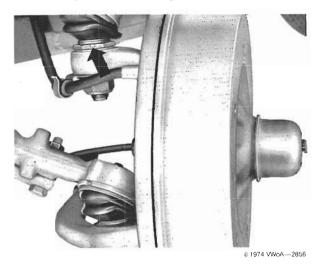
Notch in eccentric bushing (wheel removed for clarity). Adjust camber by turning the bushing a maximum of 90° to either side.
